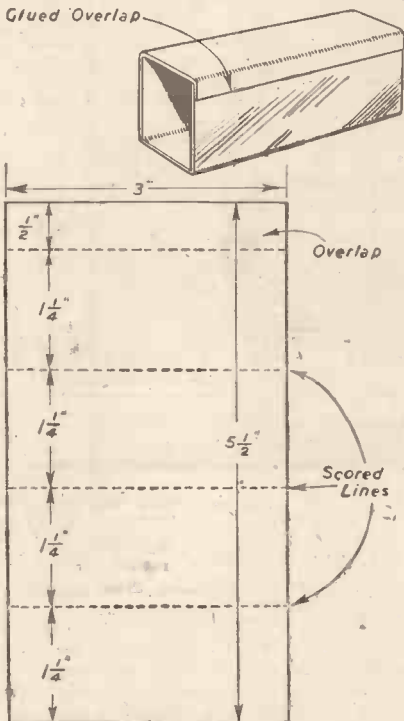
The finished former, and dimensioned cardboard blank for making it.
